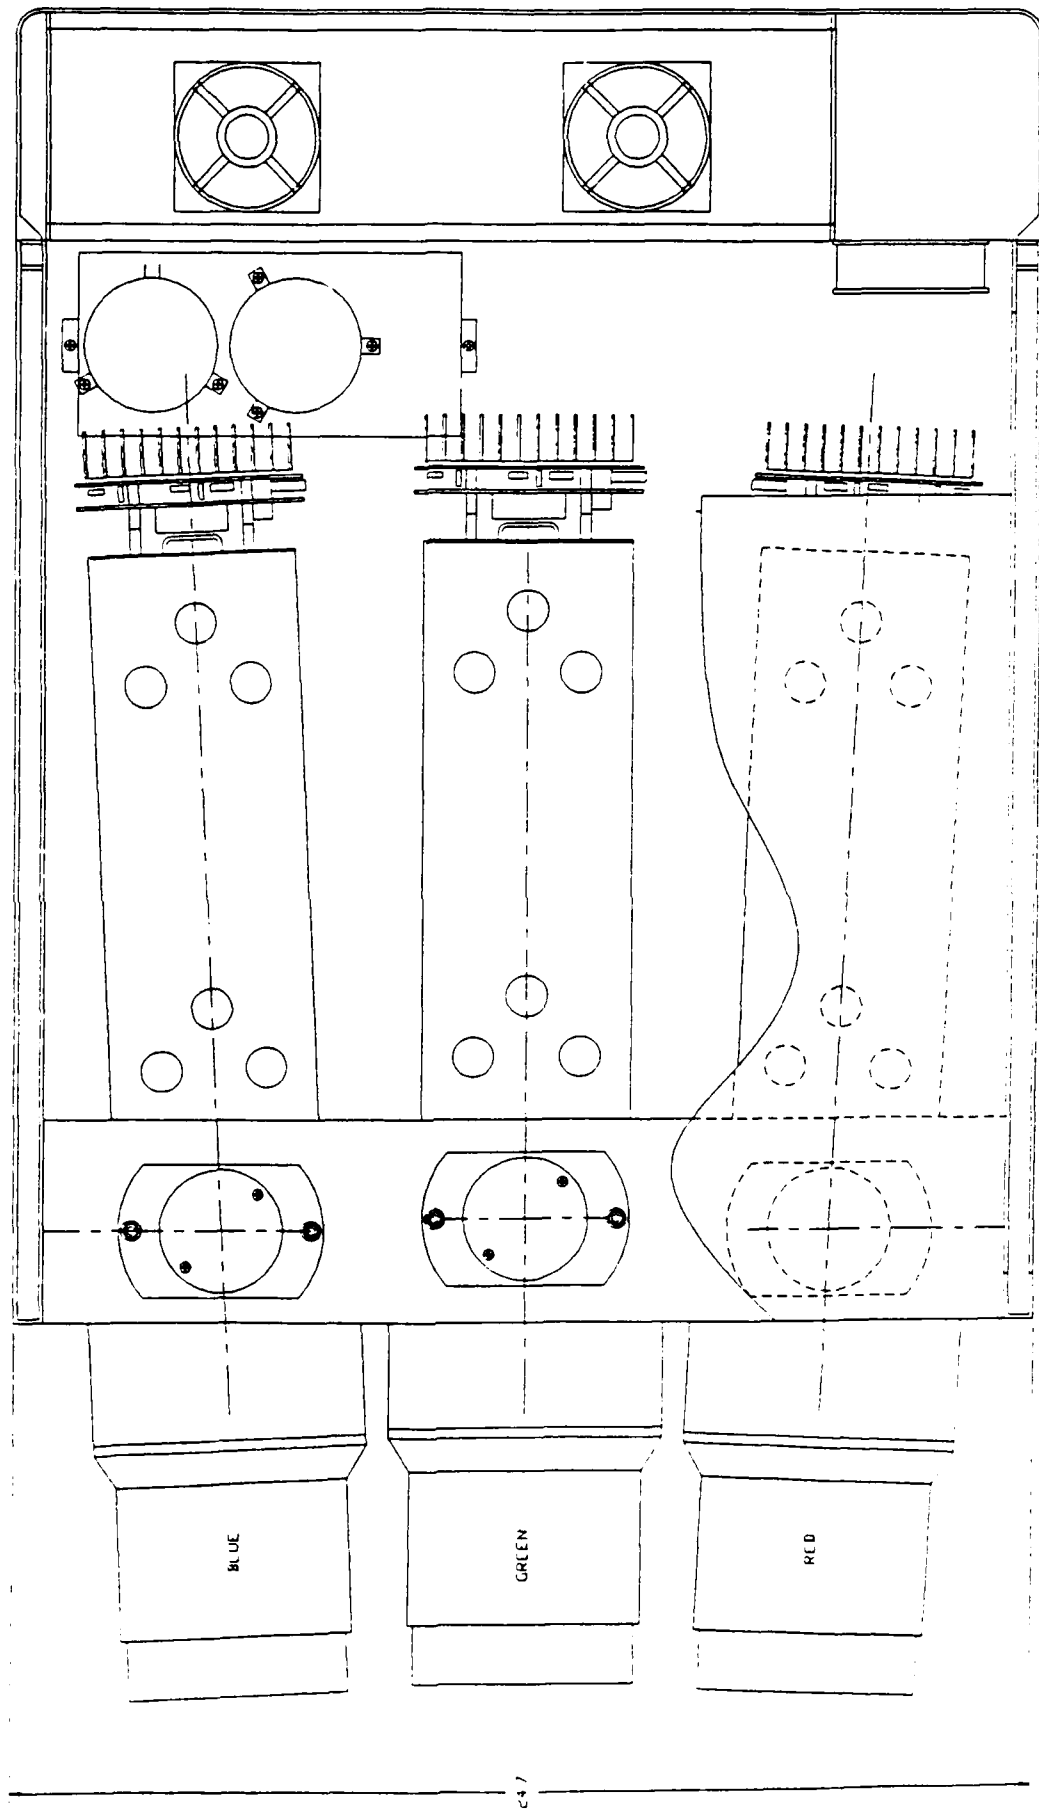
Head Assembly 4" Single Crystal Faceplate Based CRTs
